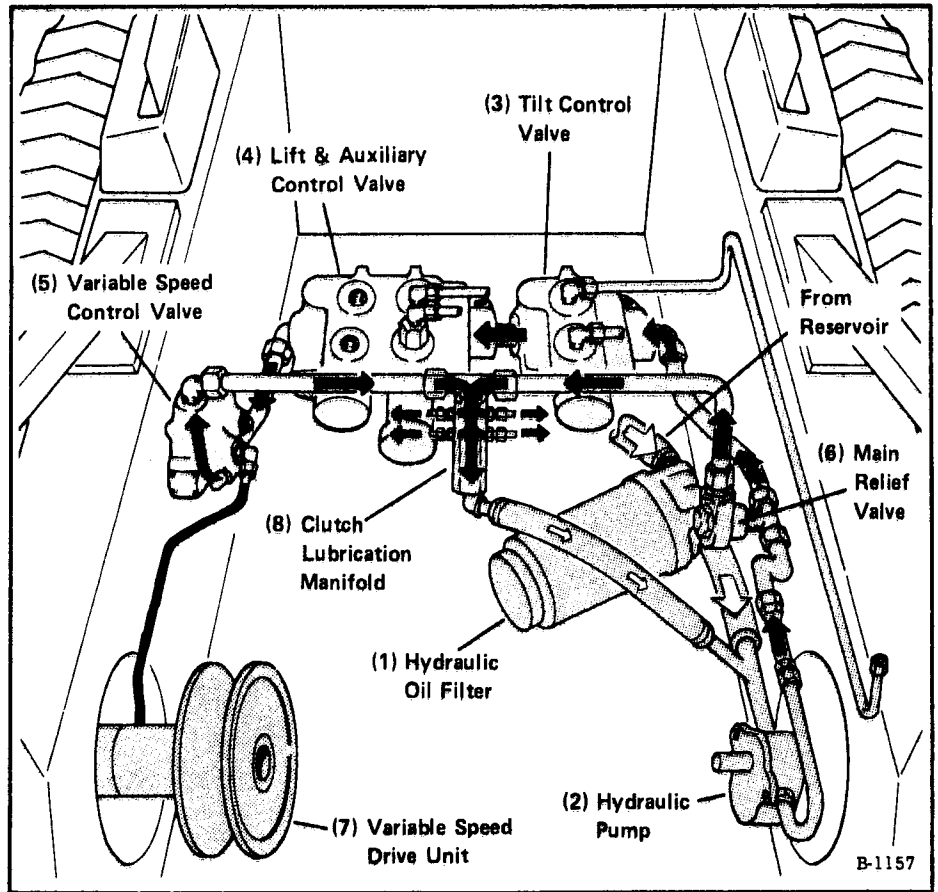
Hydraulic System (M-600 Diesel W/Deutz Engine)
